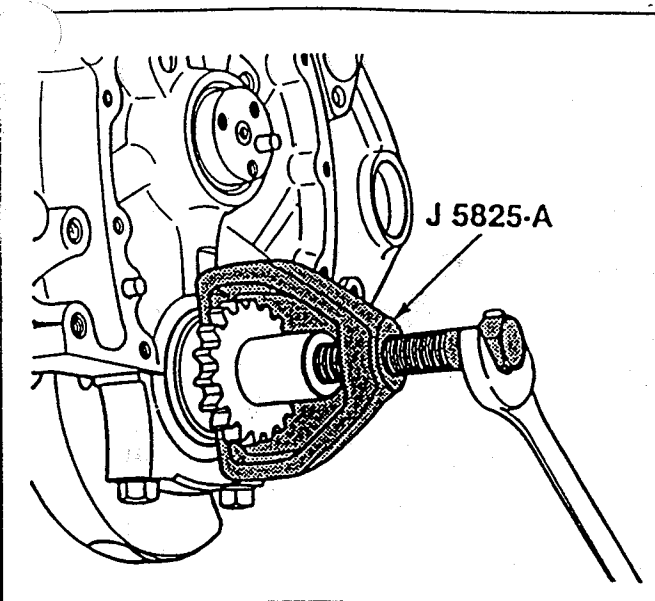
Crankshaft Sprocket Replacement (5.0L and 5.7L Engines)
